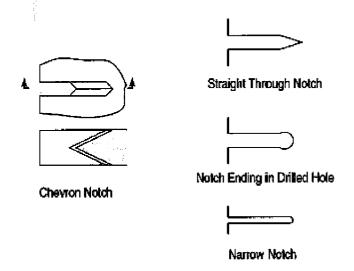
Fatigue Crack Starter Notch Configurations
